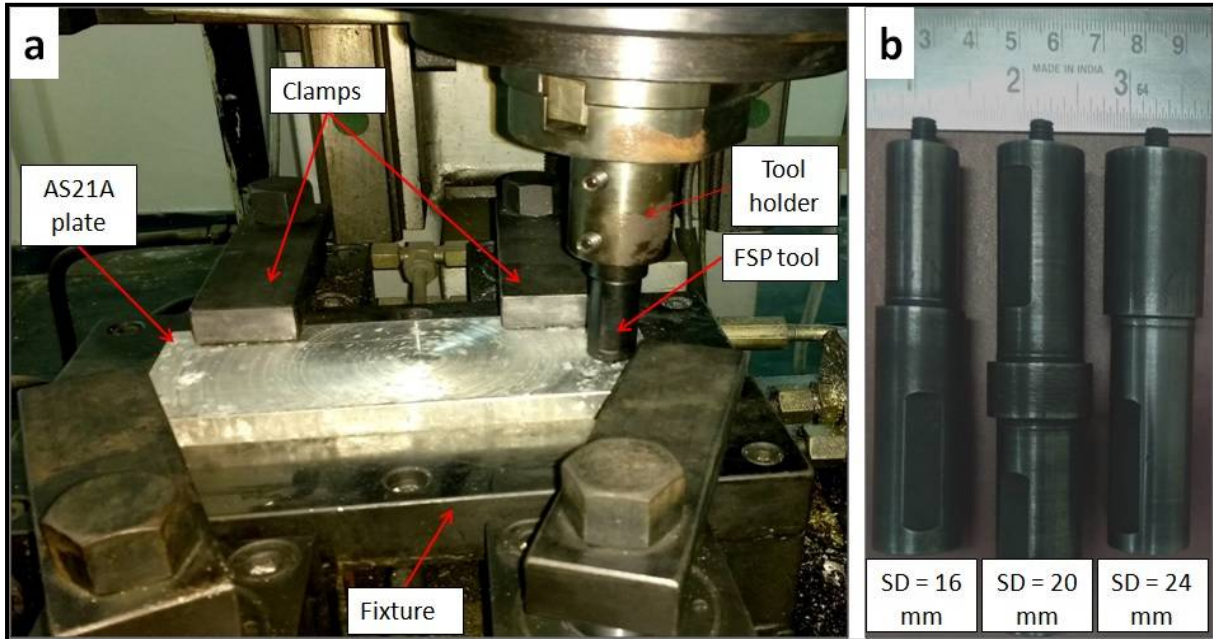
(a) Processing zone in FSW machine; (b) FSP tools
